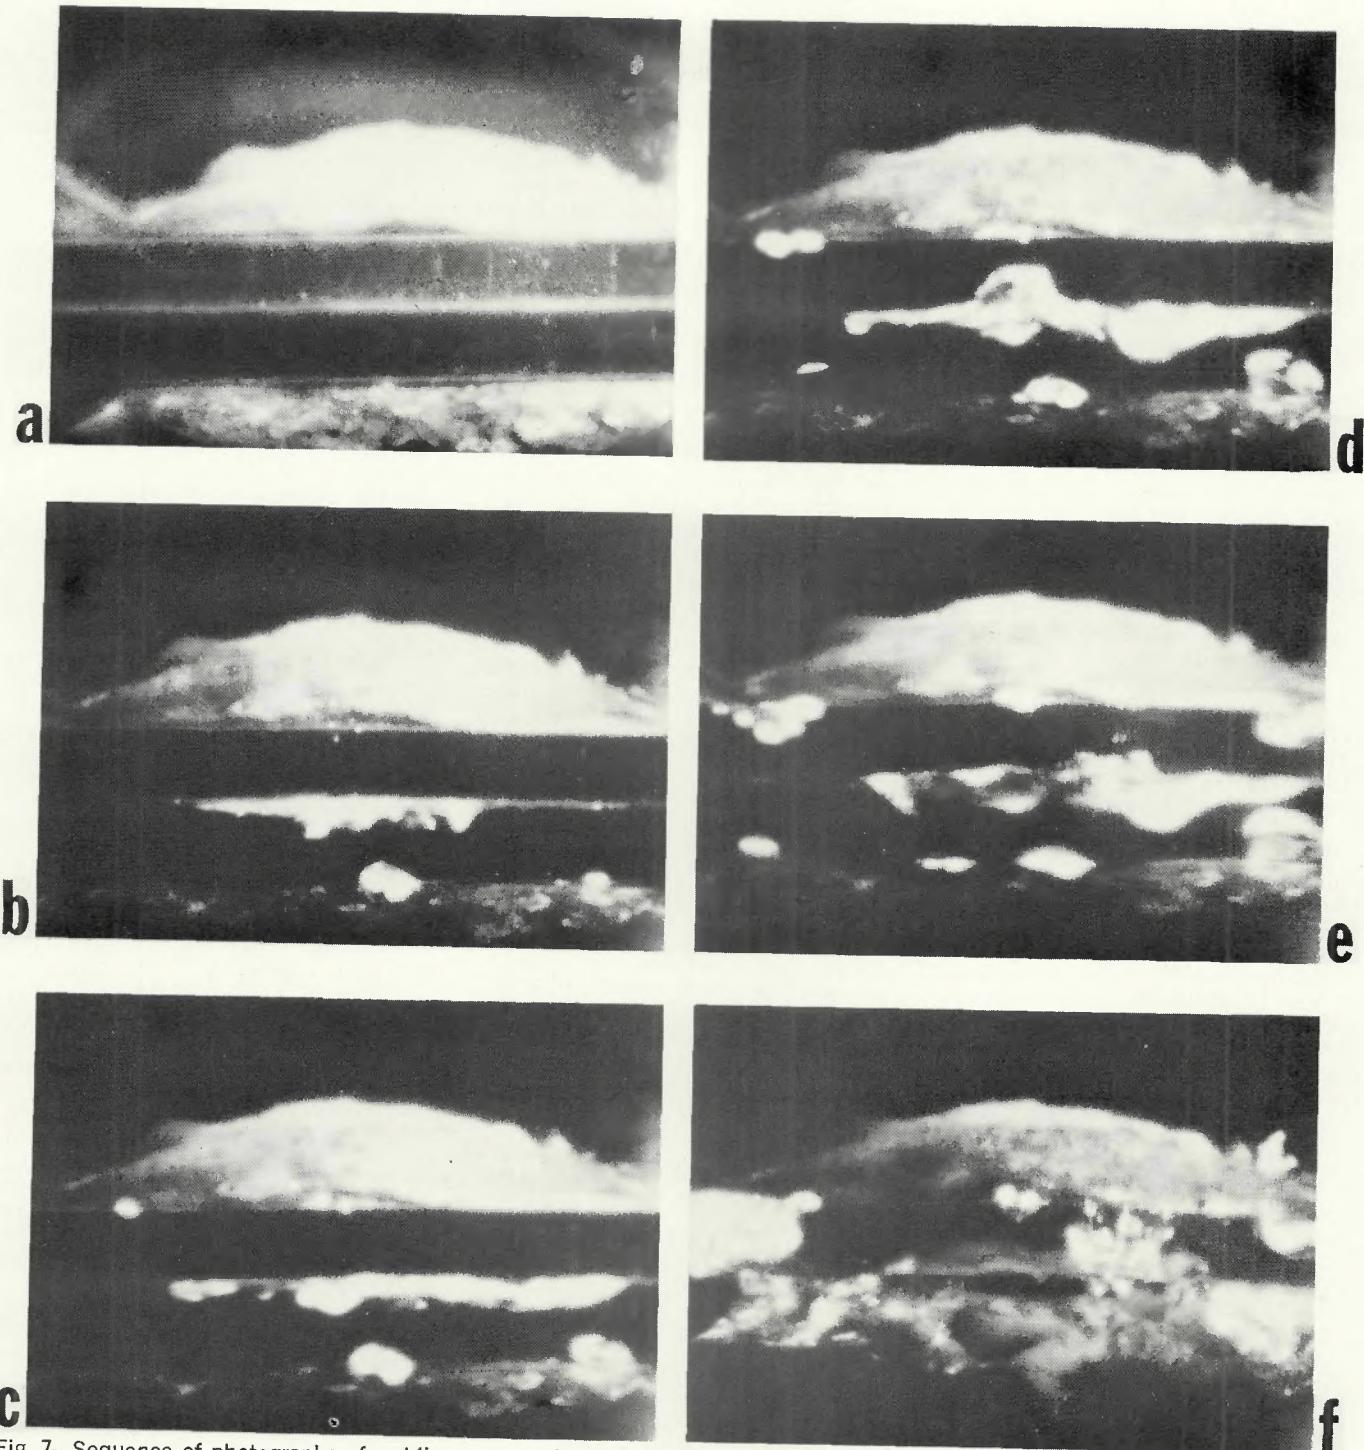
Sequence of photographs of welding process for 1000 welds made with electrodes: (a) Condition of electrodes, (b) zinc coating begins to melt, (c) zinc molten at interfaces, (d) molten zinc in cavity, (e) nugget completely formed, (f) molten zinc in cavity after current terminates
